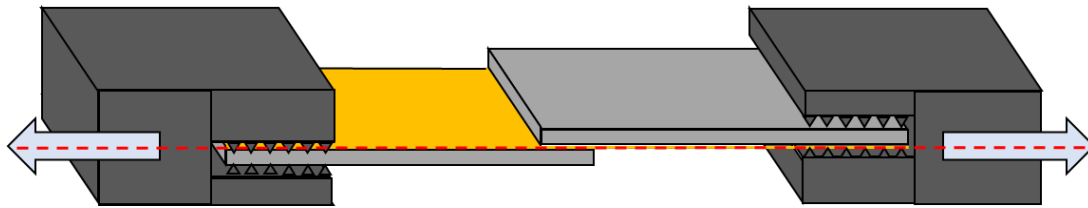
Principle of the SLS test performed on a CF/PEEK composite with PEI energy director integrated on each welding surface.
